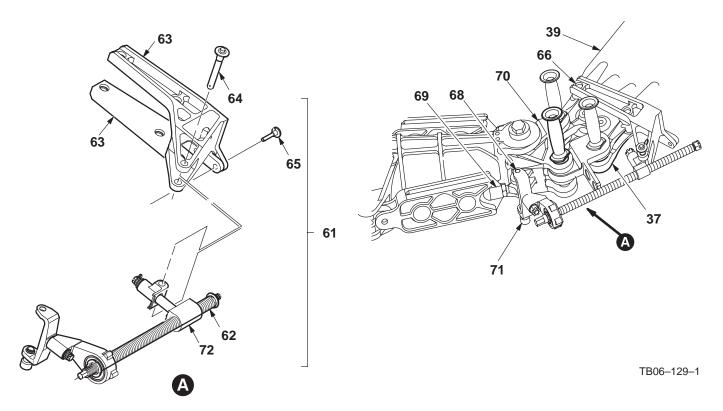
Blade Positioning Assembly on L/H AFT Main Rotor Blade
